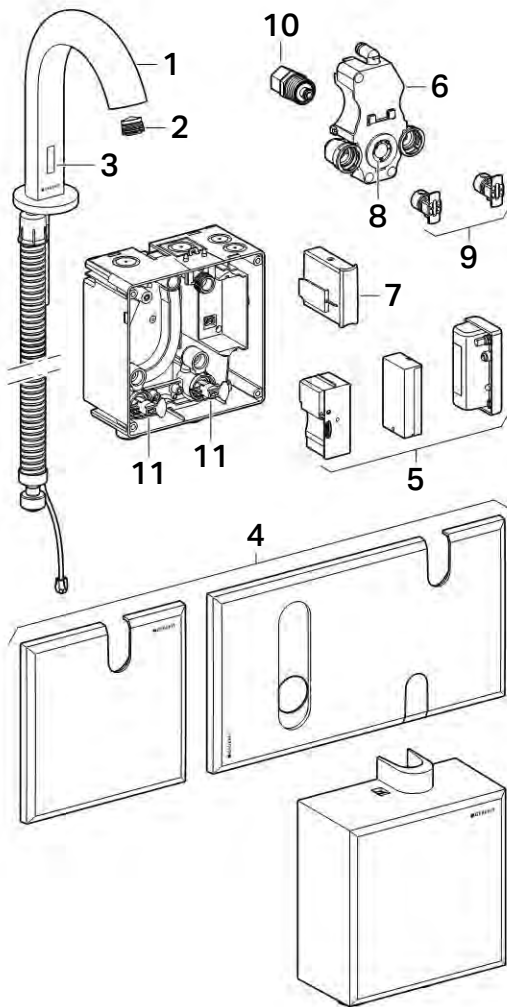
Geberit washbasin taps Piave and Brenta, deck mounting
